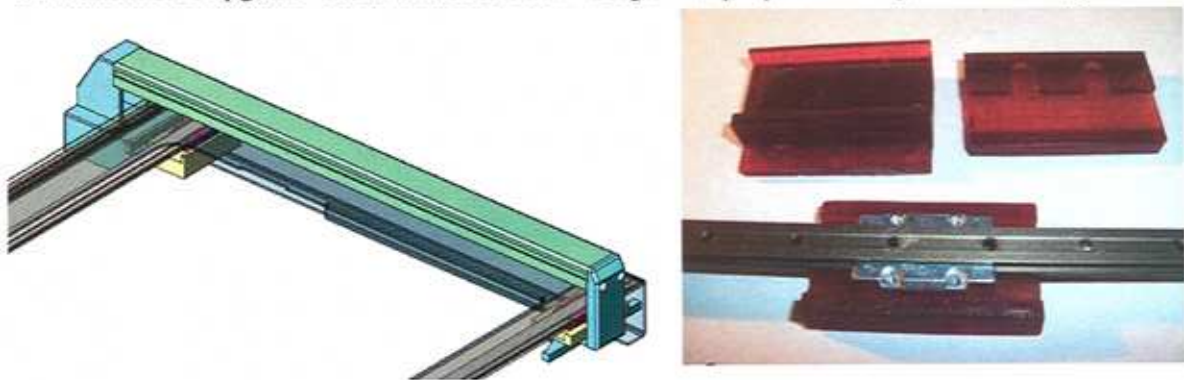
CAD Design and Direct Manufactured parts awaiting assembly
